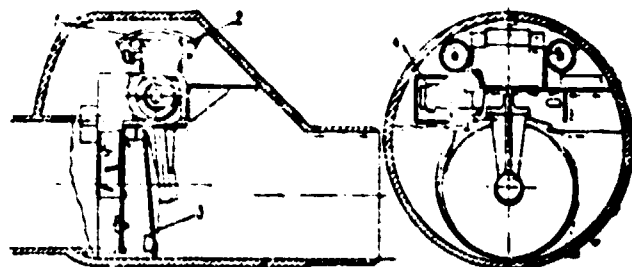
Rocking feed valve for a sodium pipeline, $d_y = 203$ mm.
